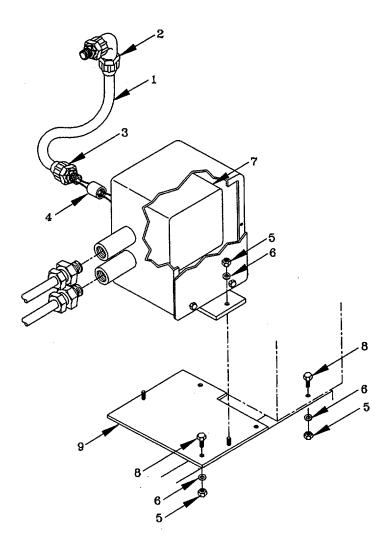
IGNITION TRANSFORMER ASSEMBLY
